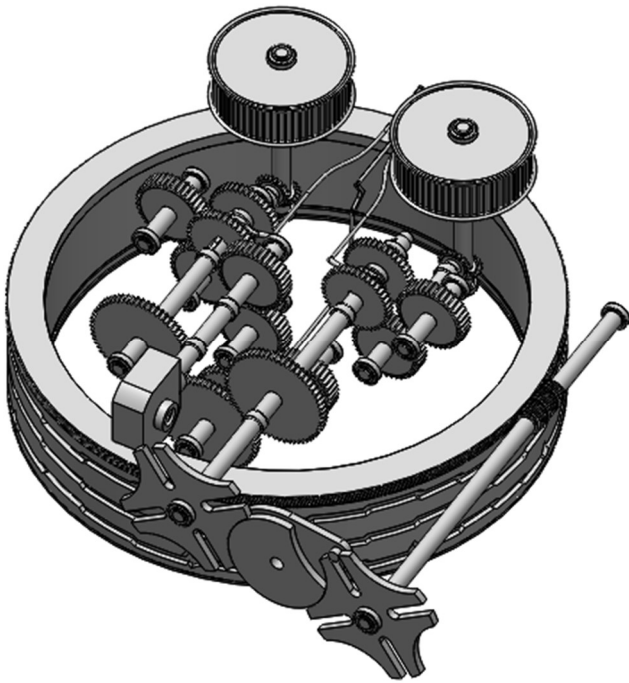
SolidWorks render of Geneva input, barrel cam mechanism, and movement transmission mechanism, first view.
